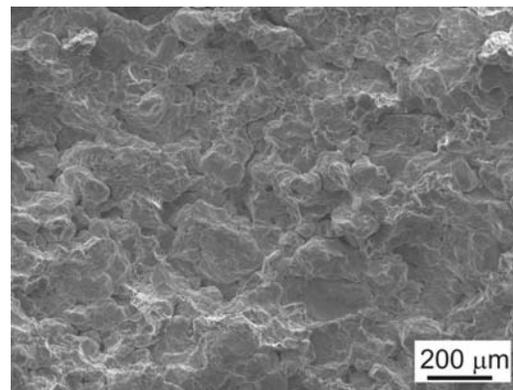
Fracture surface of specimens after pressing at 800 MPa and annealing at 500°C / 30 min.
